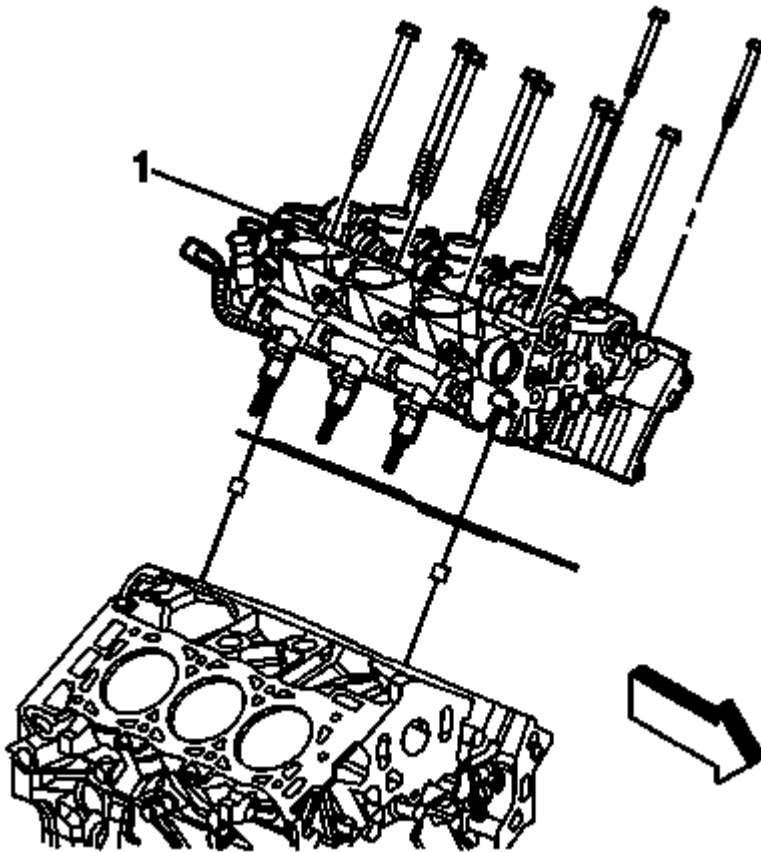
Identifying Cylinder Head and Exhaust Manifold Assembly
